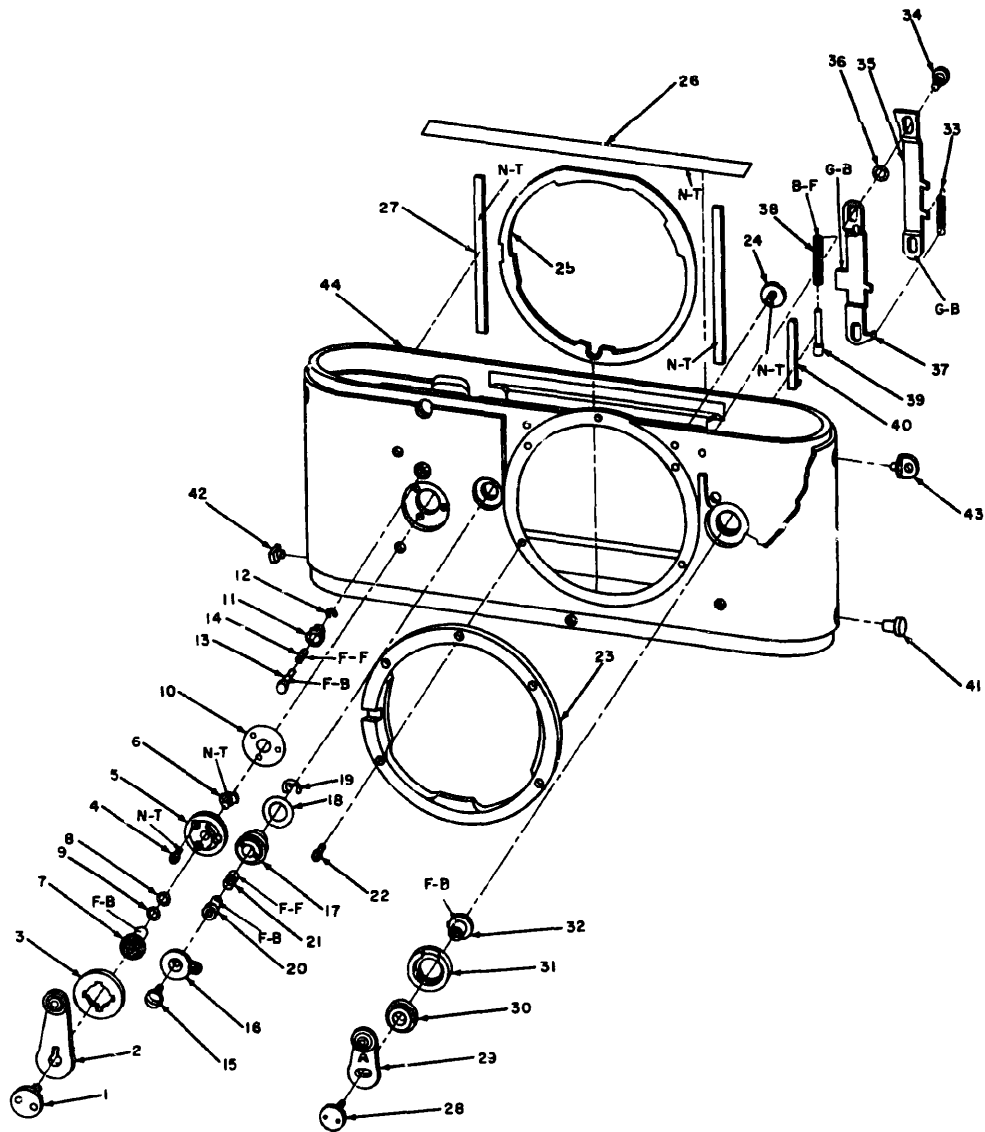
Shutter curtain and main roller assemblies, exploded view.
